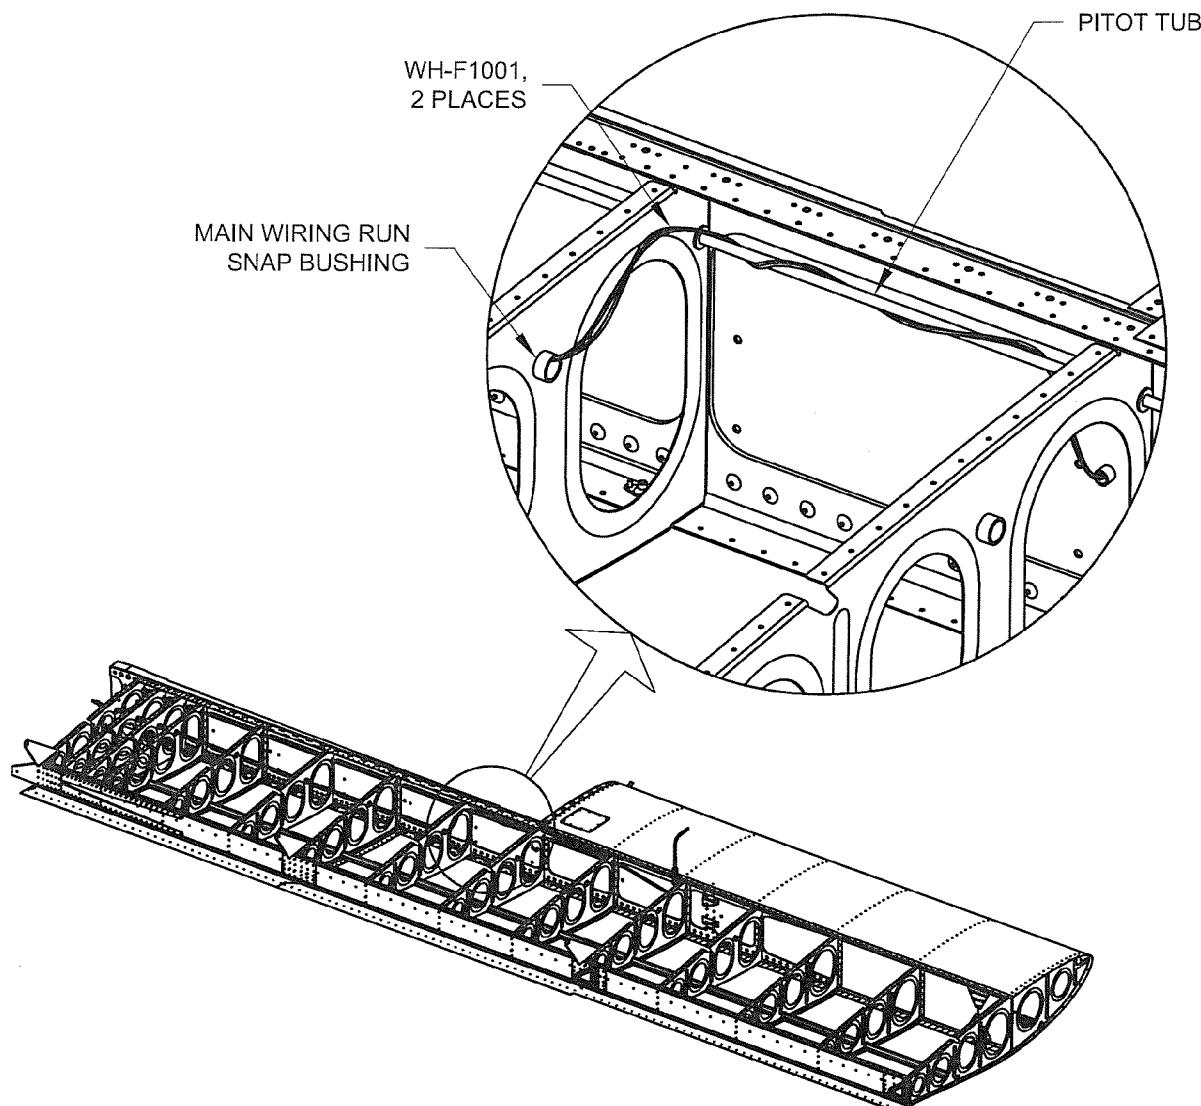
ROUTING WIRES INTO THE MAIN WING WIRE RUN
